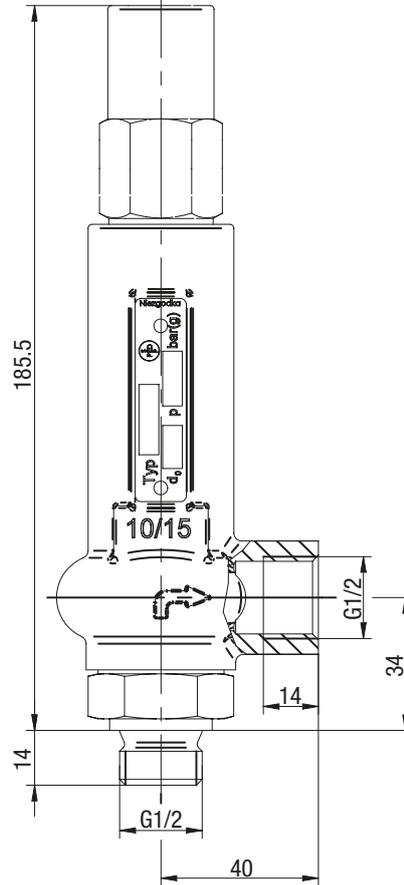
Dimensioned drawing pressure-relief valve DN10 (spring-loaded seat valve)
